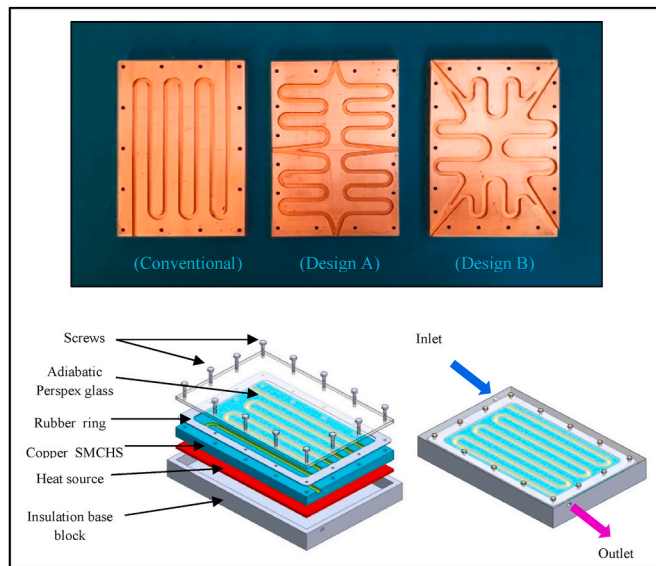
Fabricated test SMCHSs and schematic diagram of the conventional SMCHS test section assembly.
